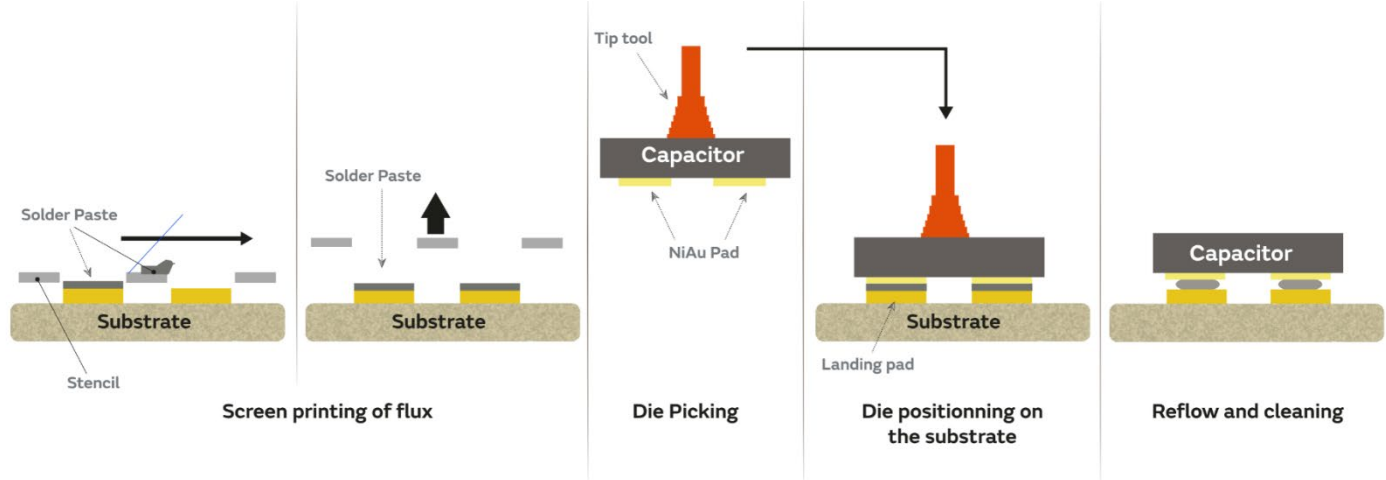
Assembly process by screen printing of solder paste on silicon capacitor
